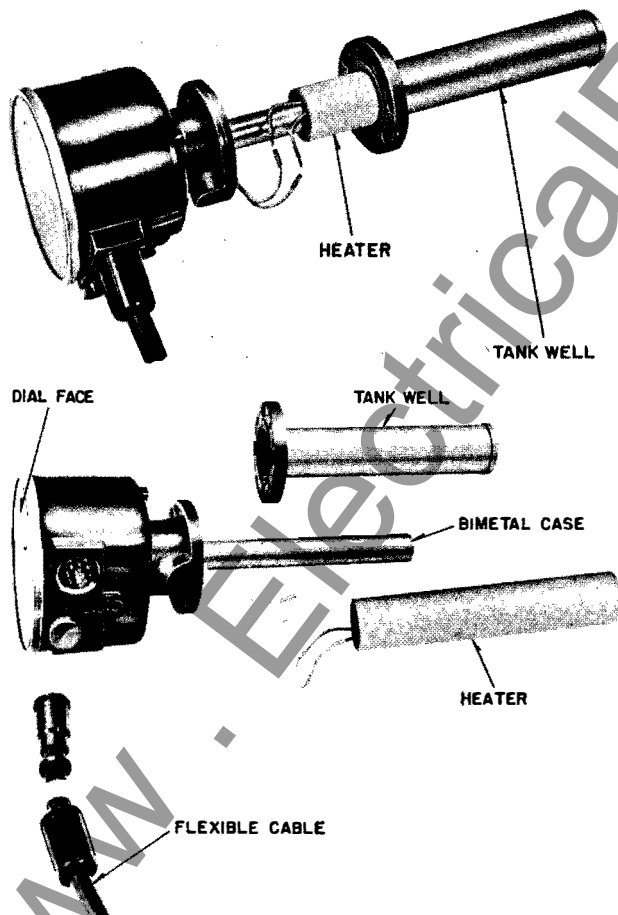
Assembly of TRO-2 Relay Tank Well, Heater Coil and Cable Attachment
